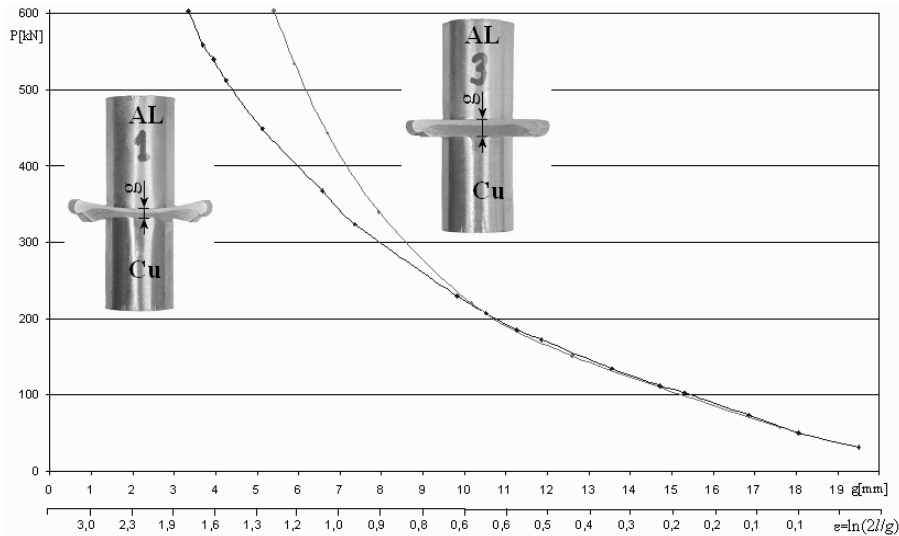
Examples of the force curves in cold pressure welding with conical and flat working surface dies
